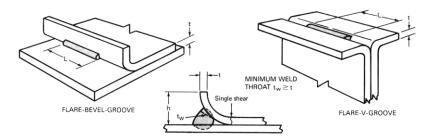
B — Single Shear in Flare-Groove Welds (See 2.2.5(2))
